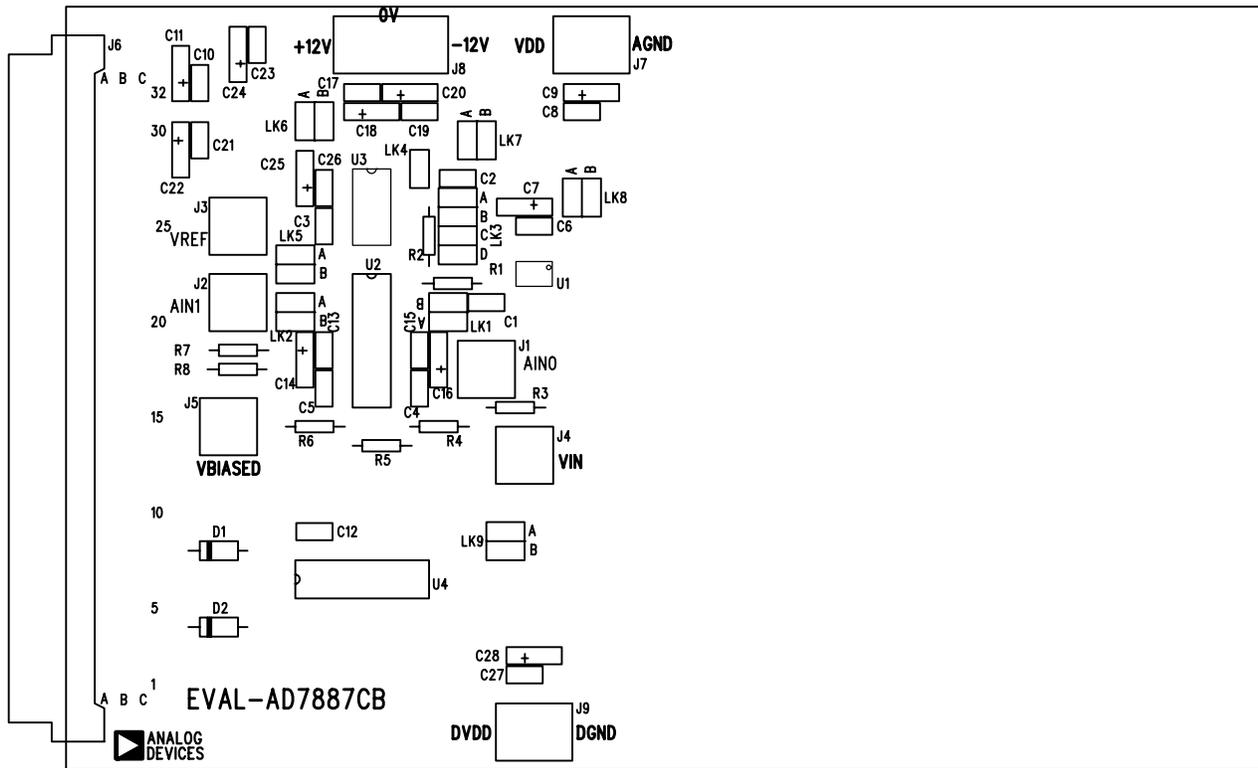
AD7887 Evaluation Board Component Placement Drawing.
